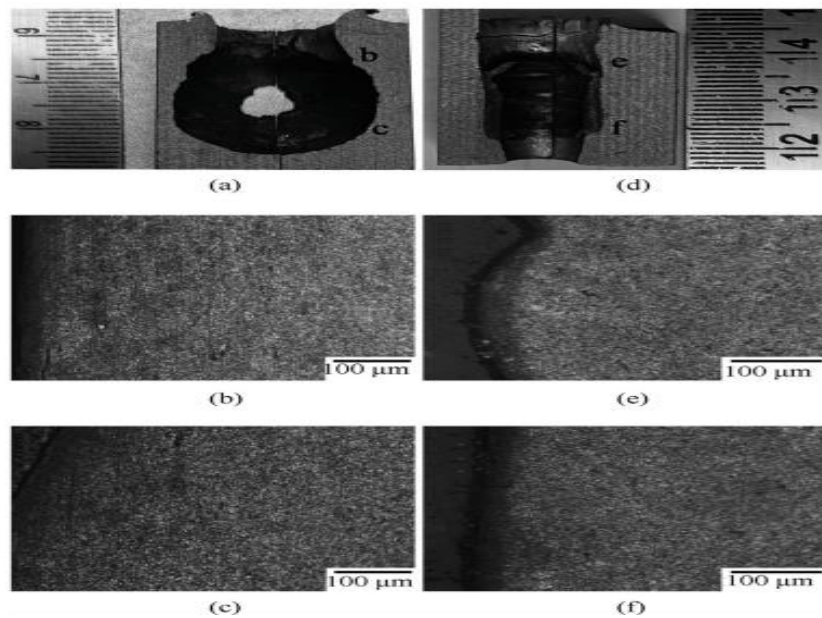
Micrographs: FSW Weld Nugget (a)e(c) lead core projectile and (d)e(f) steel core projectile
